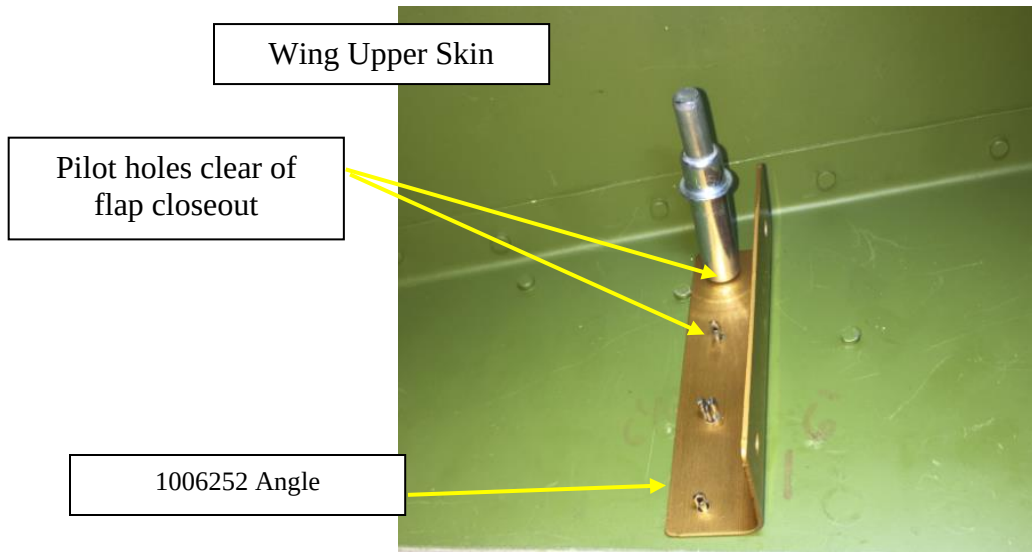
1006252 INBOARD MOUNTING ANGLE INSTALLATION
